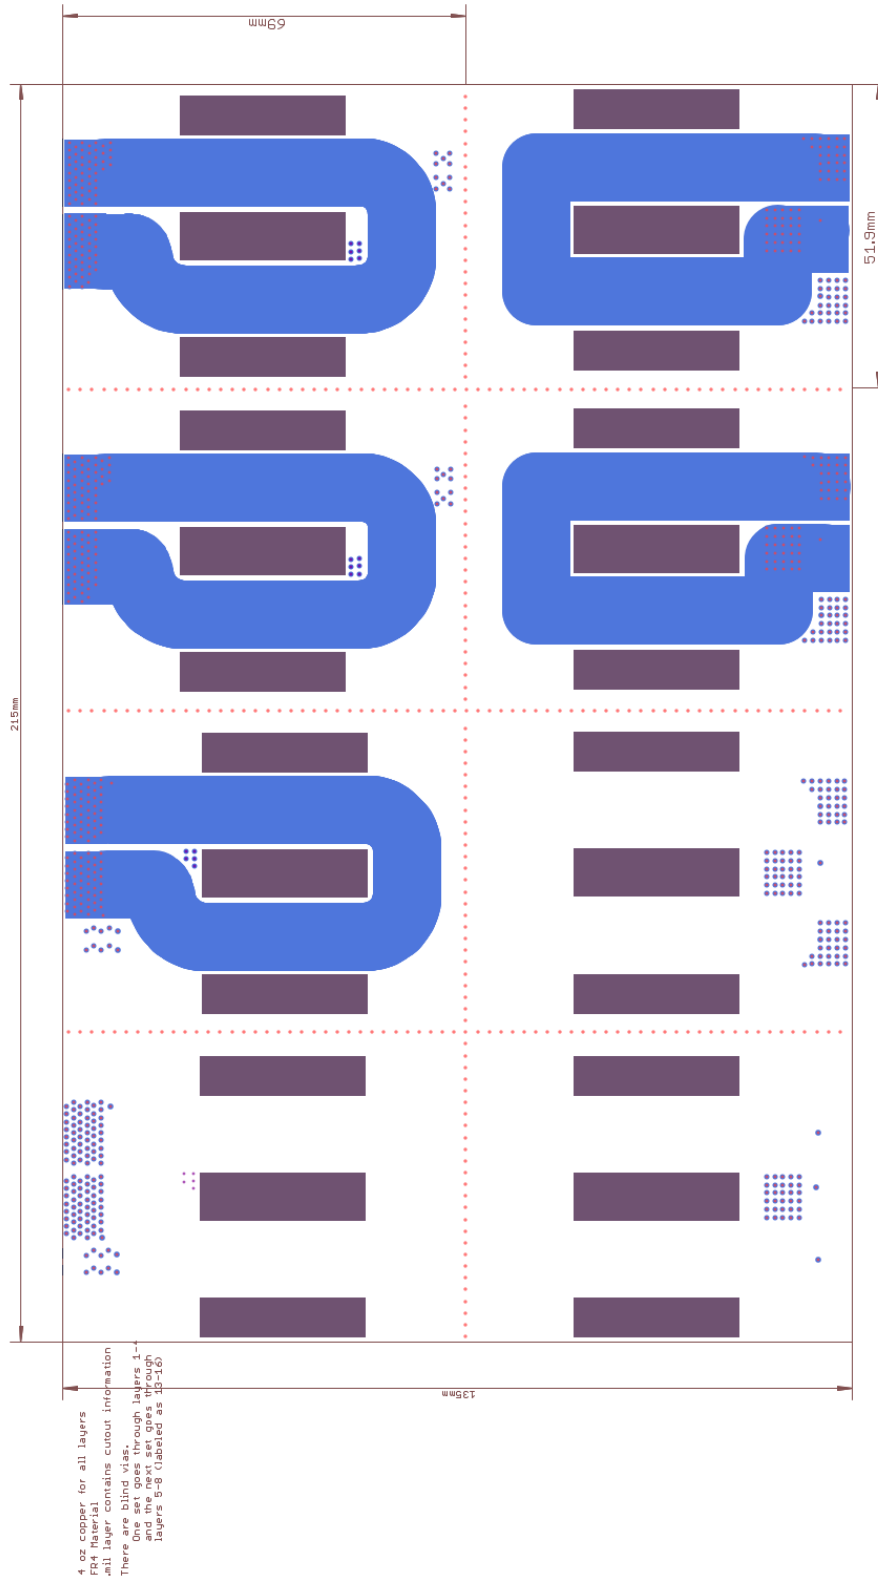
Layer 6 of the ICN transformer PCB winding (located in the top left) and other magnetic component variants. The purple rectangles indicate cutouts in the board.
